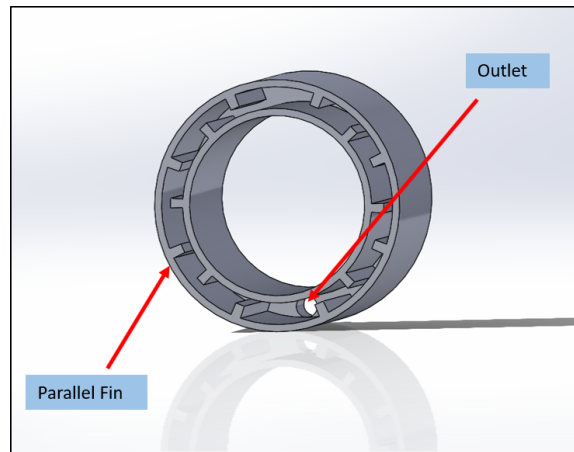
Section view of cylinder assembly in Design A with internal cooling path.
